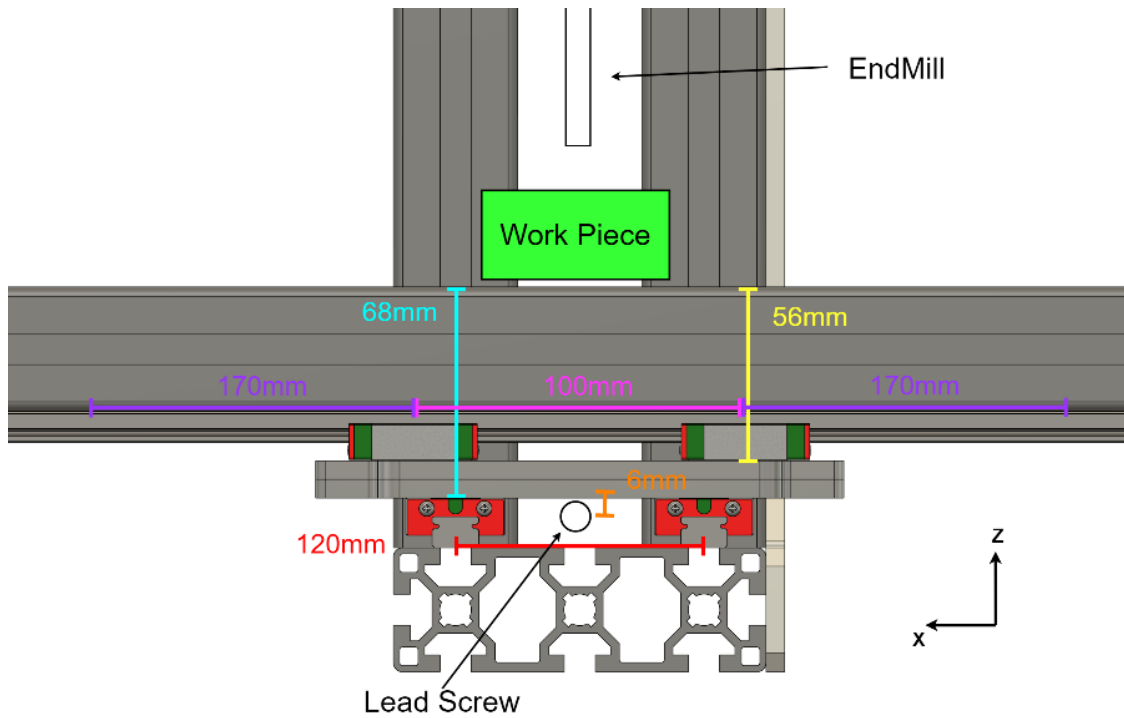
Front view of the machine, where both X and Y axis are equipped with MNG15H linear rail assemblies. All distances and measurements can be easily identified and prompted into the linear rail configurator tool.
